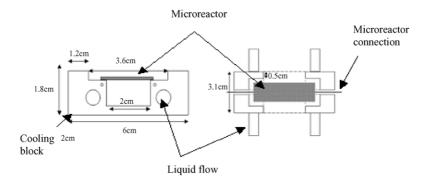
Drawings of the cooling copper block: left, side view; right, top view.
